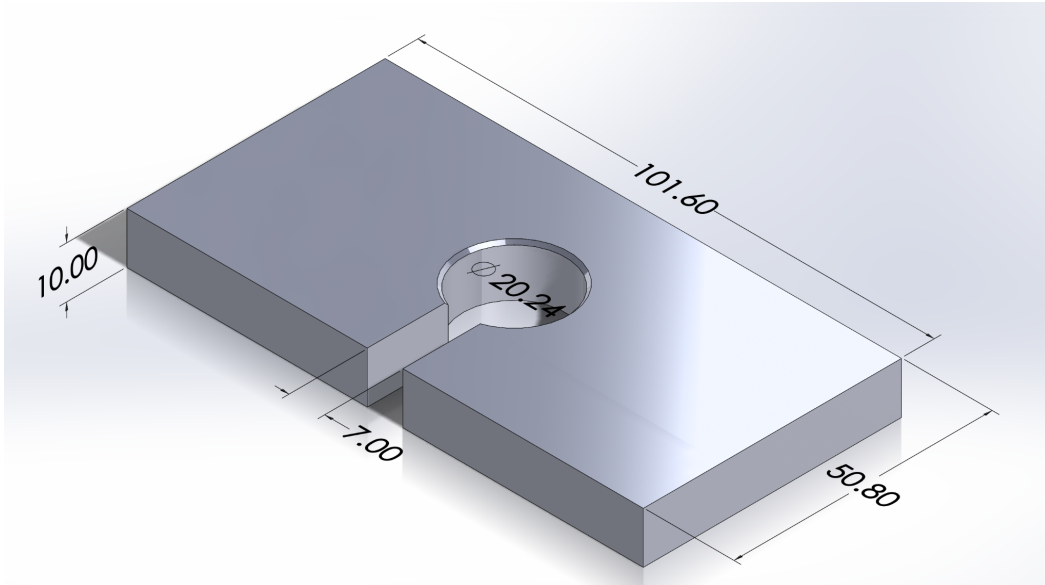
Load Cell Housing Plate. Dimensions are in mm.
